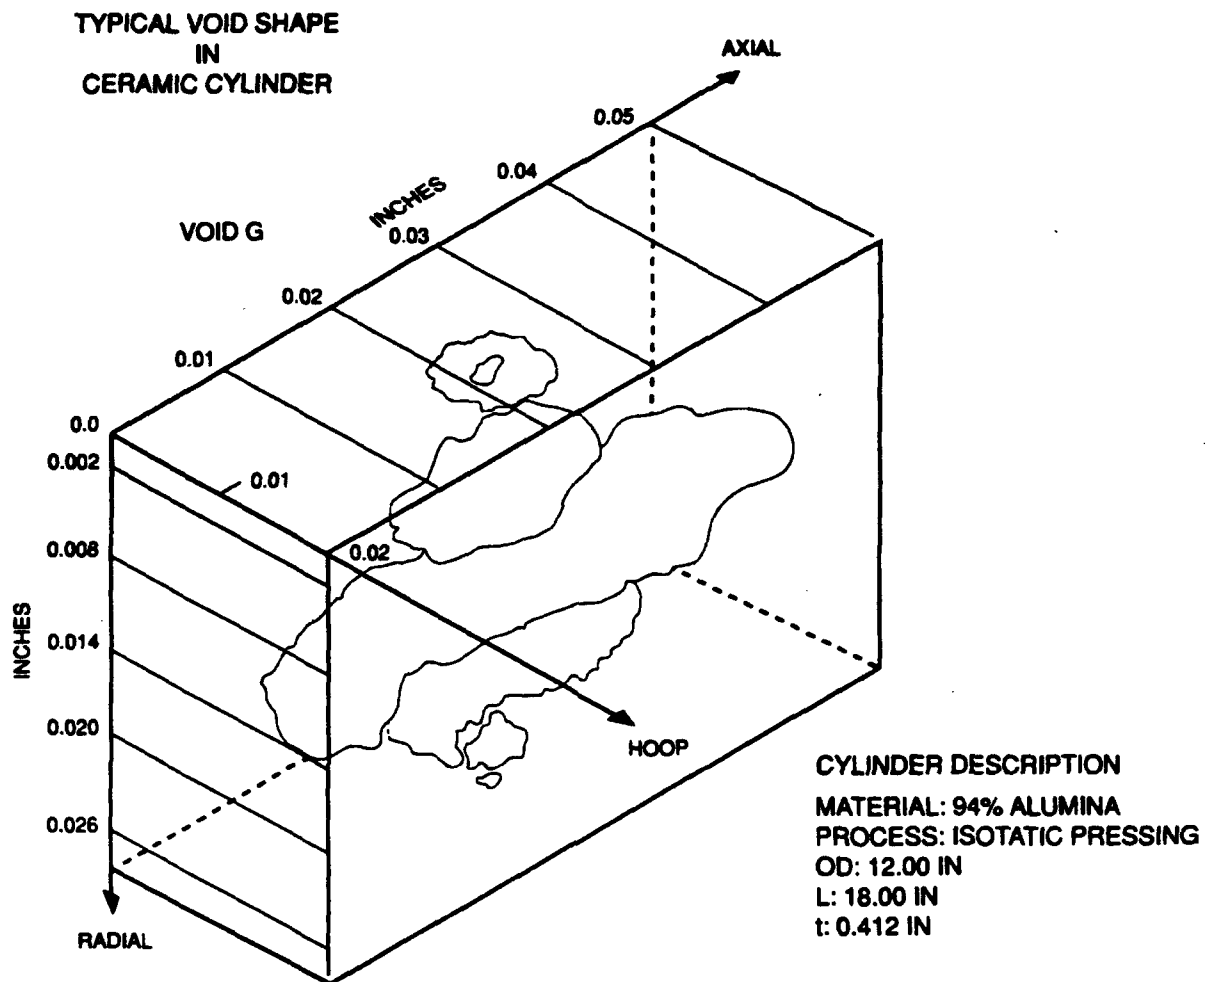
Three-dimensional reconstruction of a typical flaw on the basis of cross section images uncovered during successive passes of the grinding wheel. Note that the irregularity of the flaw shape makes it impossible to analyze its crack initiation potential by analytical approaches of fracture mechanics.
